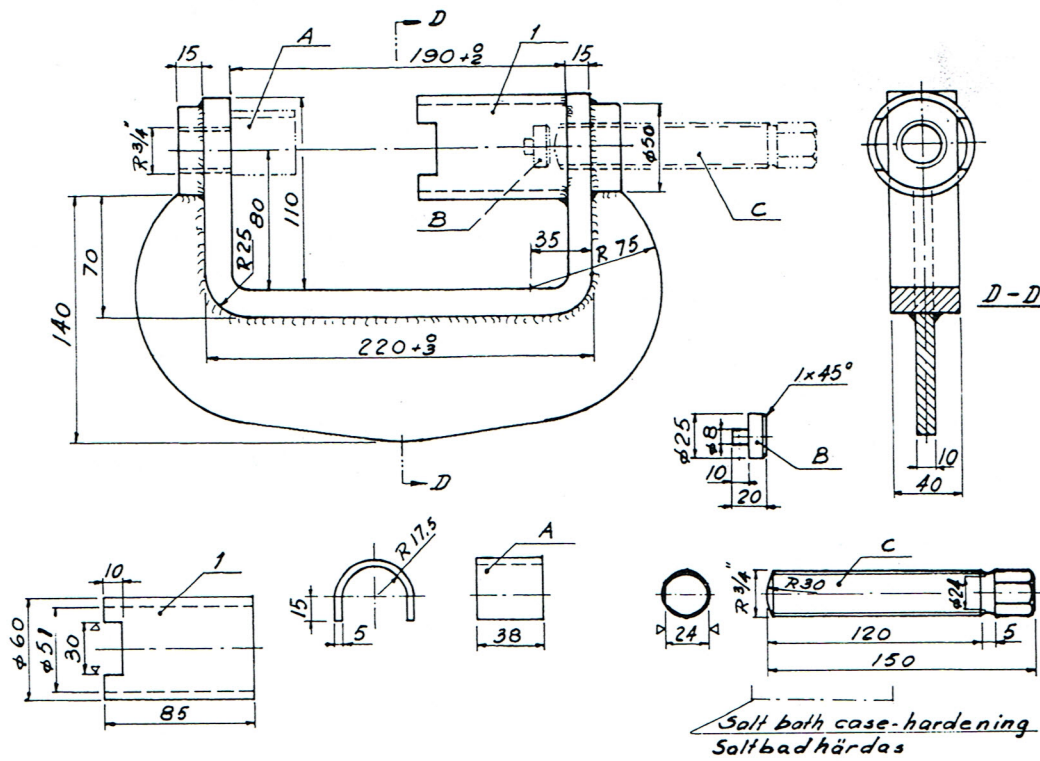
Assembly yoke, to be manufactured of material SIS 1311, except parts B and C, which are manufactured of material SIS 1550
